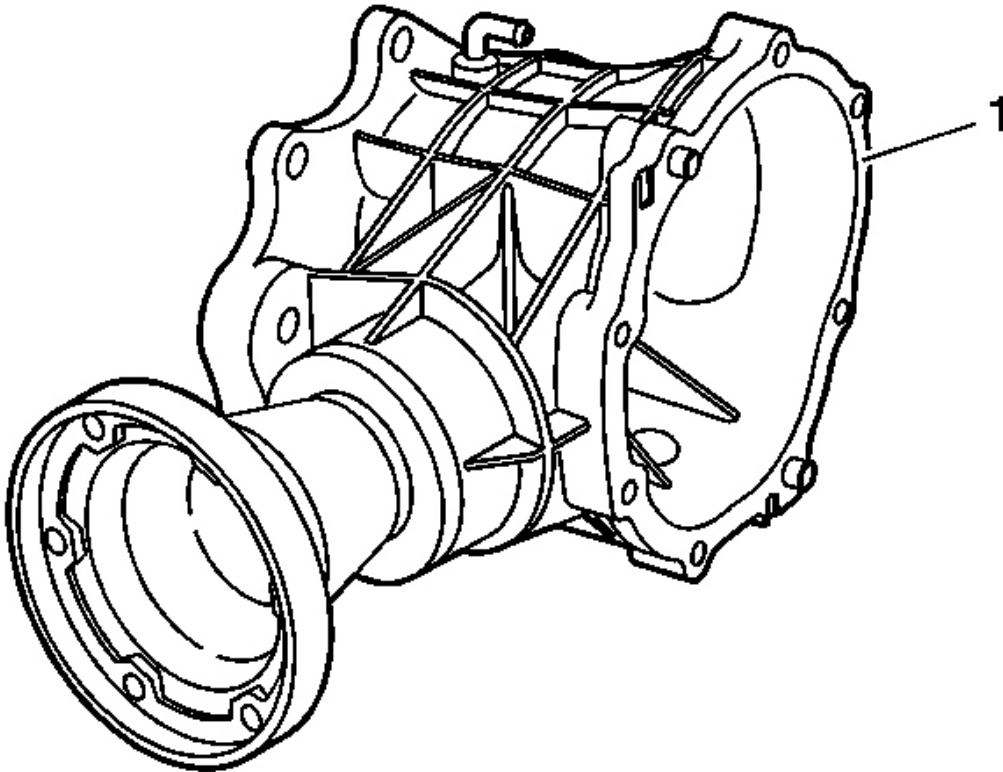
Cleaning Carrier Assembly Housing Sealing Surface
